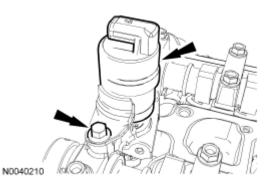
Locating Variable Camshaft Timing (VCT) Solenoid And Bolt Courtesy of FORD MOTOR CO.
